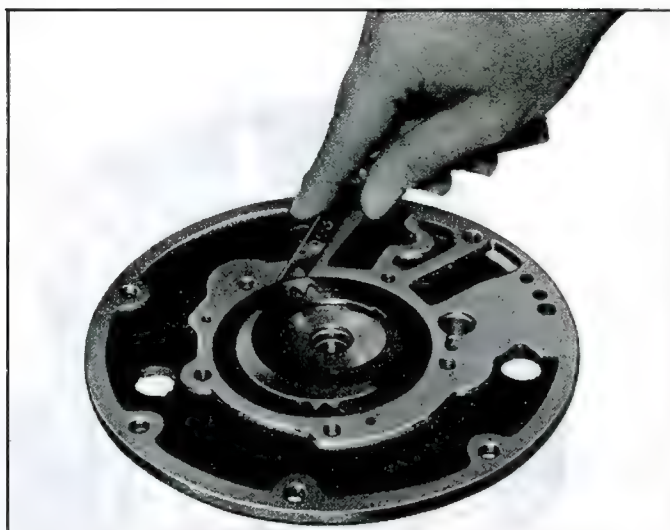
E-31—Checking Driven Gear-to-Pump Body Clearance
